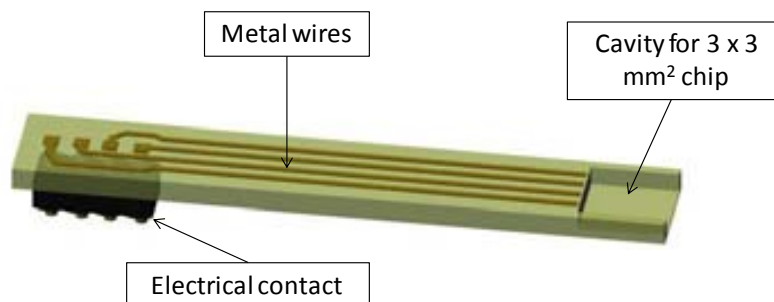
Schematic figure of the PCBs used to package the IDEs. Courtesy of Fernandez-Cuesta [9].
